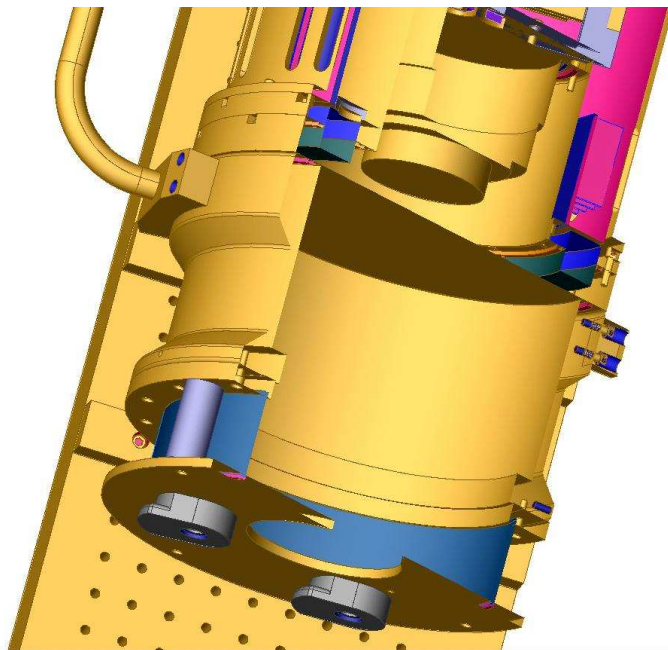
Cutaway view of optical integrating cavity with exit aperture at bottom.
